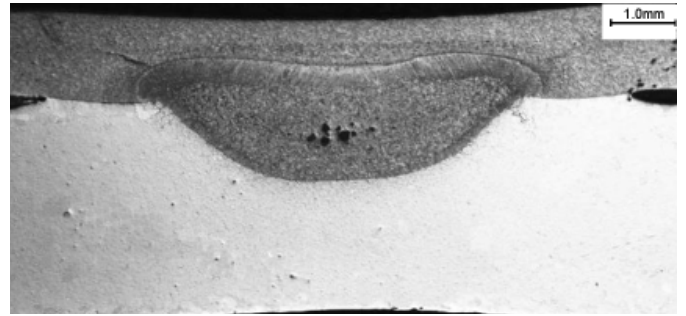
General view of the weld joint with visible cracks and porosity in the welding nugget, etched with Ma1Al
